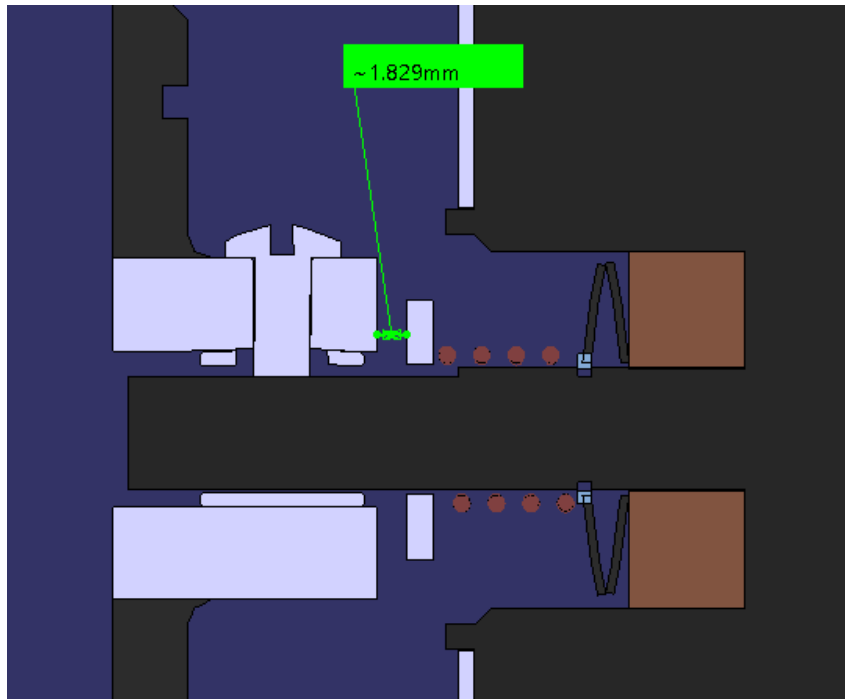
Axial configuration at the lower tolerance limit of the turbine length (418 mm), showing the presence of a gap between the flat washer and the turbine–motor junction component, resulting in no contact with the spring.
